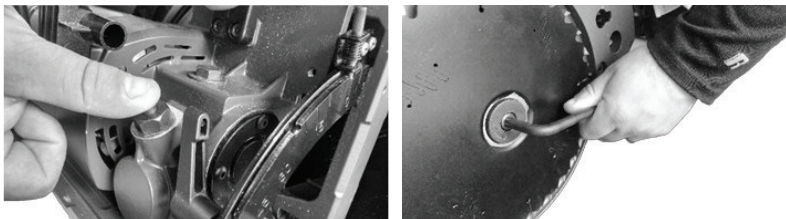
and b. Dust cover removal after releasing magnet on dust cover.
